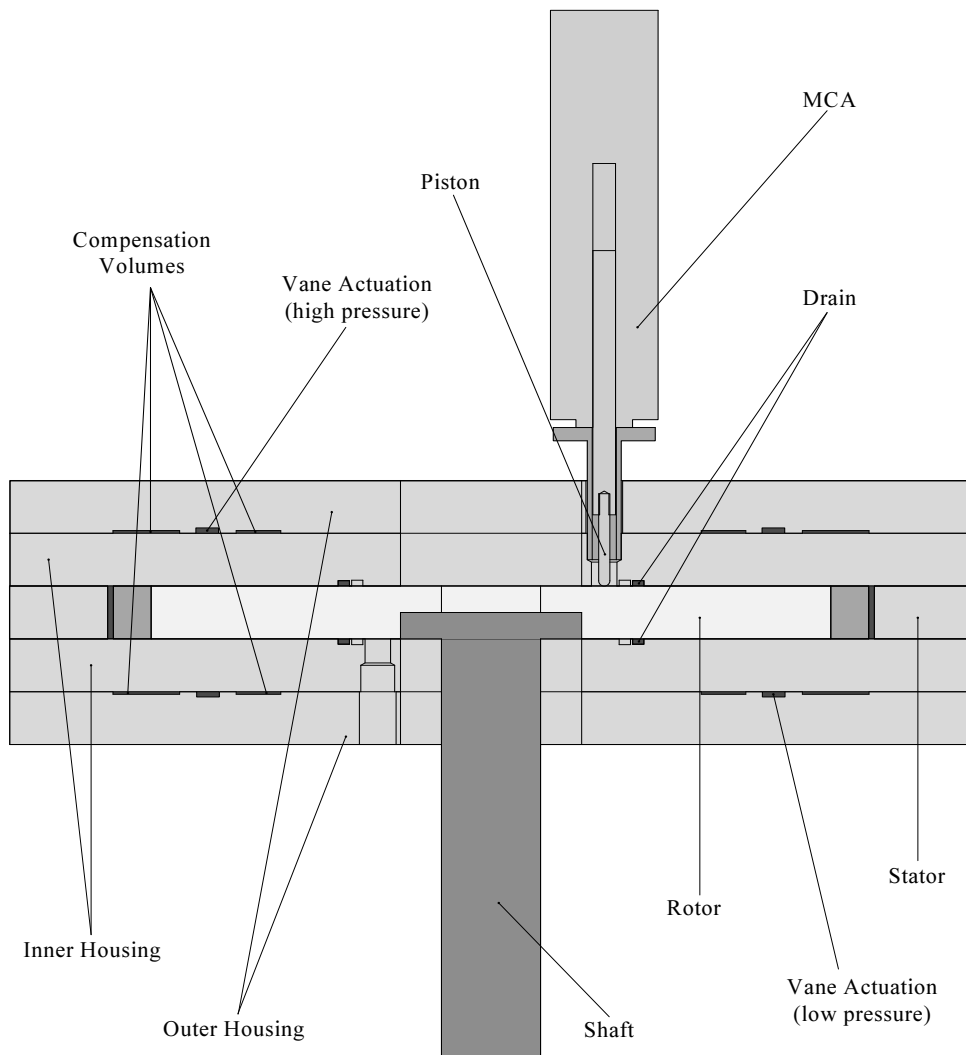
The prototype motor in a section cut with compensation volumes and the moving coil actuator mounted
